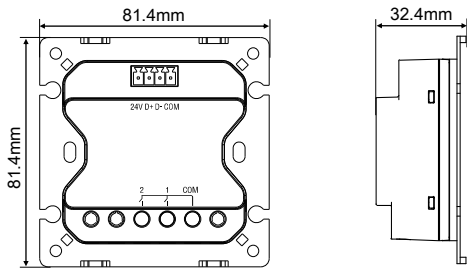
Dimensions - Back View Figure 4. Dimensions - Side View
